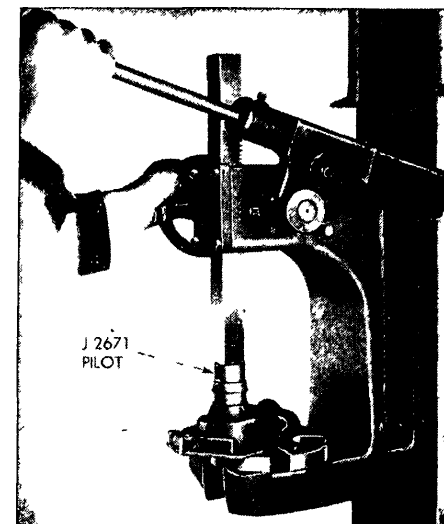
B Use a piece of $1\frac{1}{2}$ " pipe or the pilot shown to press bearing retainer into water pump body. 1937-52
